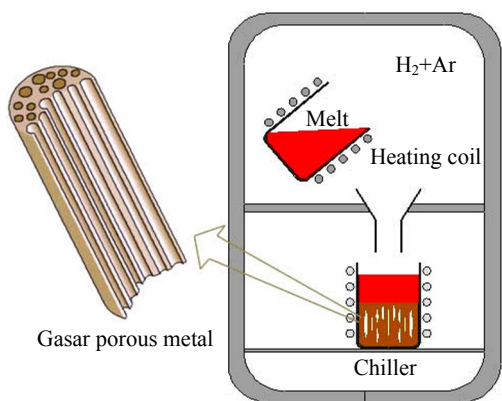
Schematic drawing of the fabrication apparatus for Gasar porous materials
